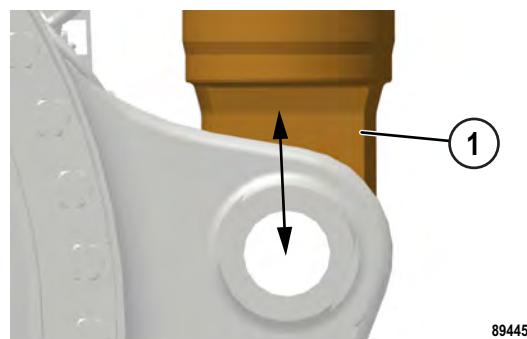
LOWER SUSPENSION EYE ALIGNMENT
